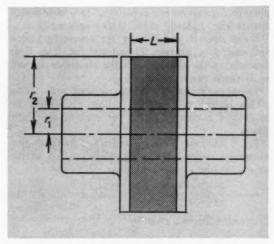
Simple shear-type coupling design with elastomer section bonded to parallel flange faces.
